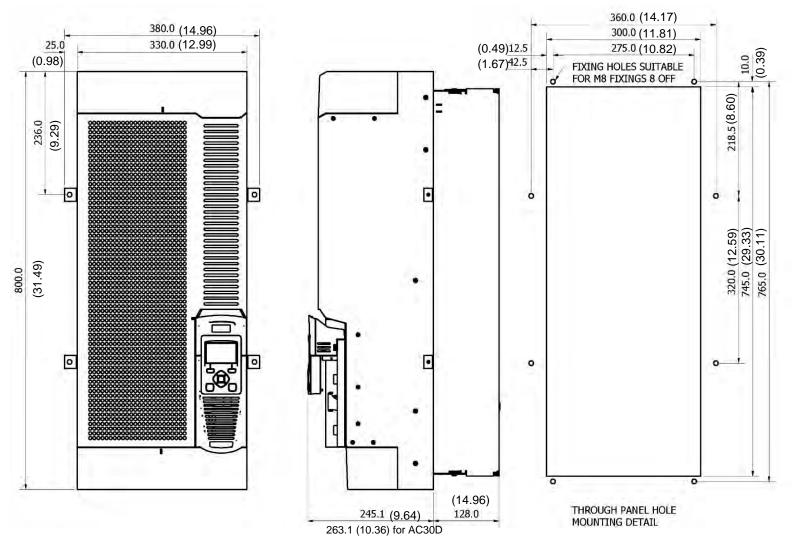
Mechanical Dimensions for Through Panel Frame J - All dimensions are in millimetres (inches) Fixings: 8 x 9.0mm holes M8 fixings, refer to panel mounting kit part number LA502793
